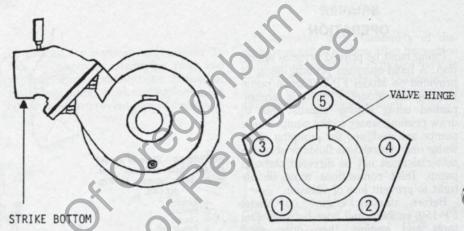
Strike bottom of outlet with a mallet to seat valve.
